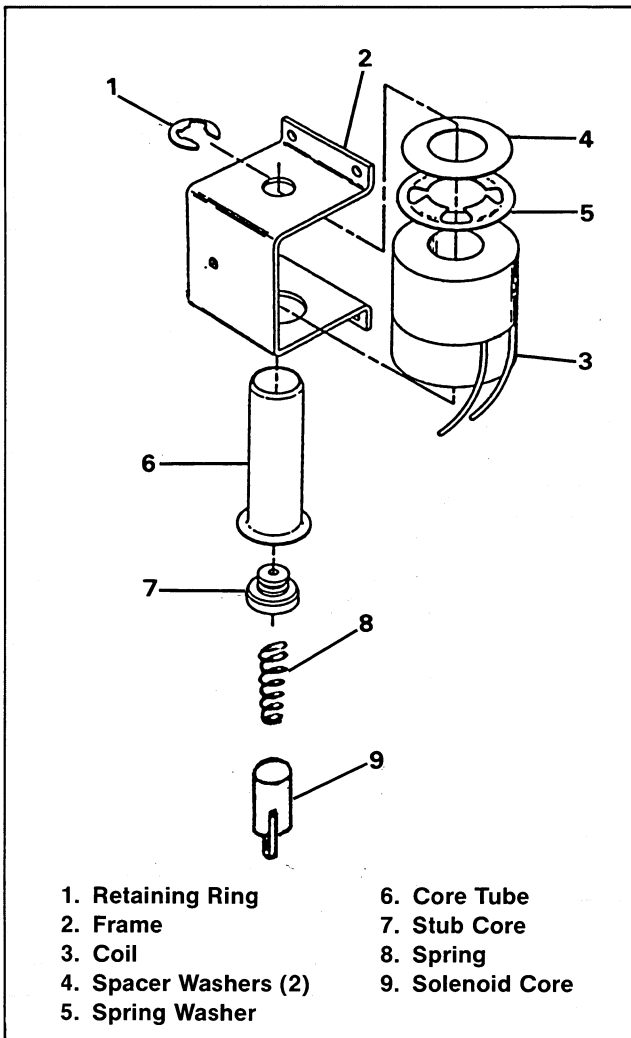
Solenoid Assembly (225-400 Ampere)
